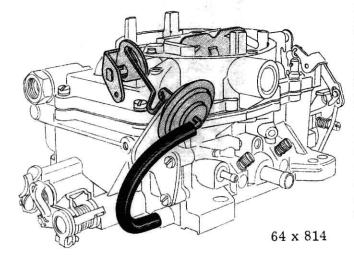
AFB Carburetor with Diaphragm Choke Modulator (FirePower 360 Engine)
